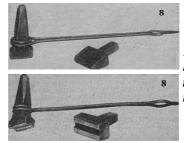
Above, top and bottom fullers; below, top and bottom, rounding tools.
